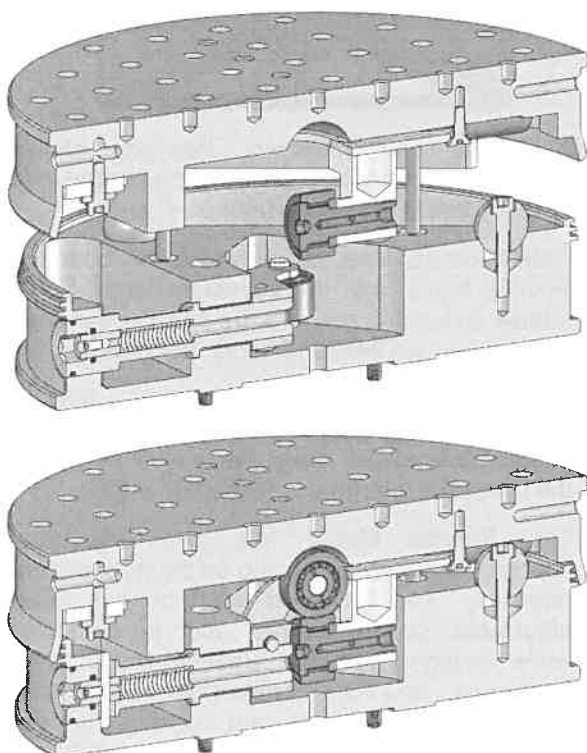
Section views show the QRC unlatched and disengaged (top) and engaged and latched (bottom).
